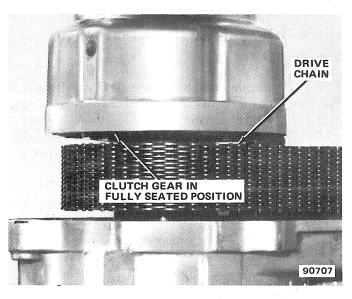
D-67 Seating Viscous Coupling on Clutch Gear
